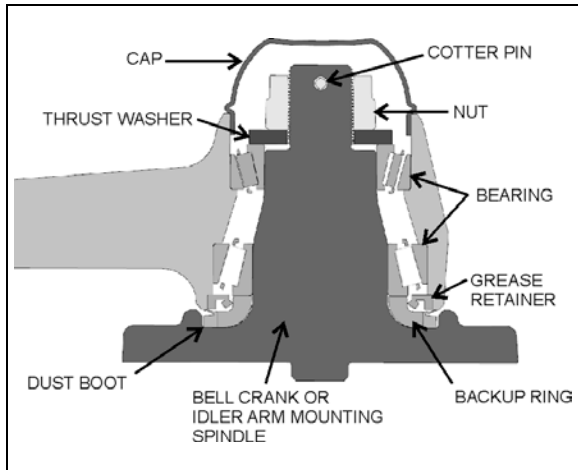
BELL CRANK OR IDLER ARM HUB
